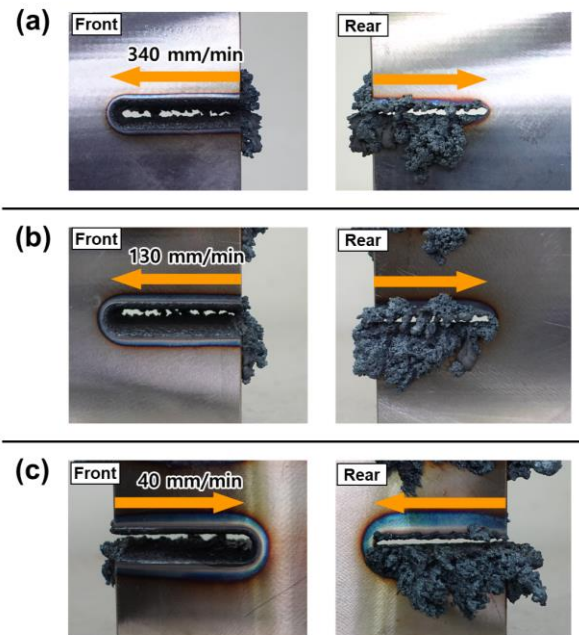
Front, rear surfaces of the stainless-steel plates cut at the maximum cutting speed for the stand-off distance of 300 mm. The thickness of the specimens: (a) 10 mm, (b) 20 mm, (c) 30 mm.
